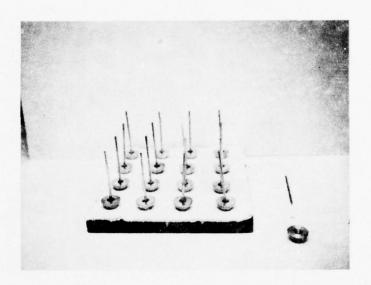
Exhaust Tube Brazing Fixture: The copper exhaust tubes are self-fixturing in the holes of the end caps as shown. The Fiberfrax sheet permits a short length of the exhaust tube to extend through the end cap for added support.
